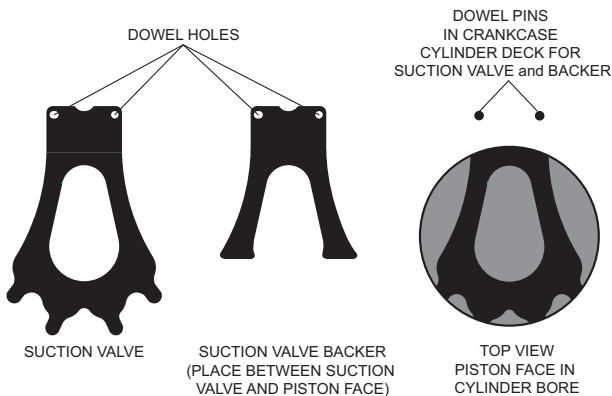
Piston, Suction Valve, and Backer Positions (06E)
